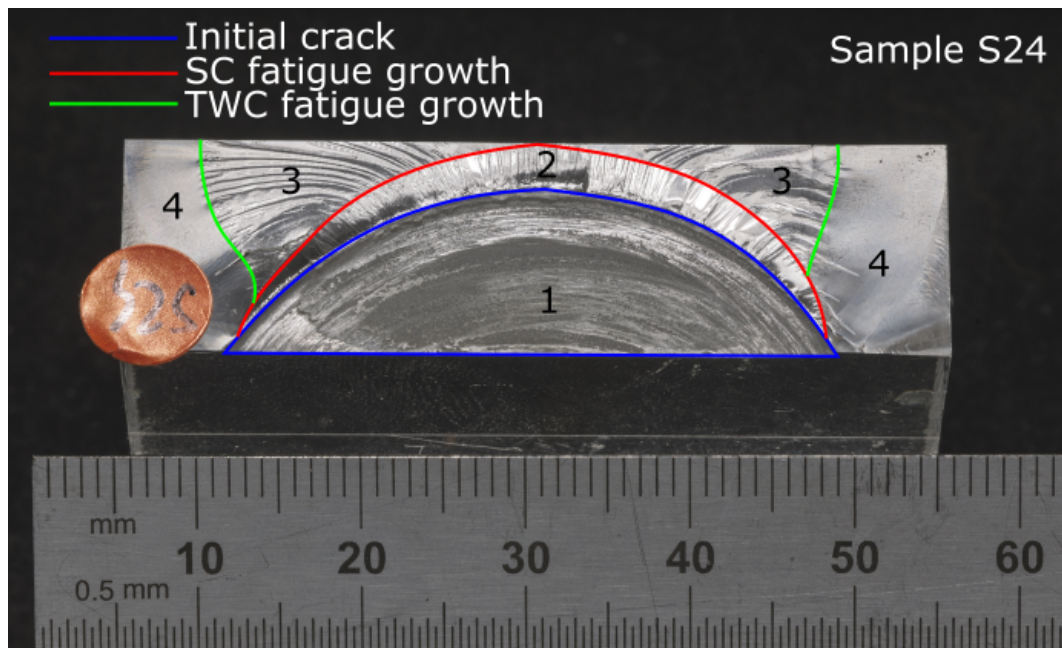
Test on Perspex plate - Fracture surface - Sample S24
